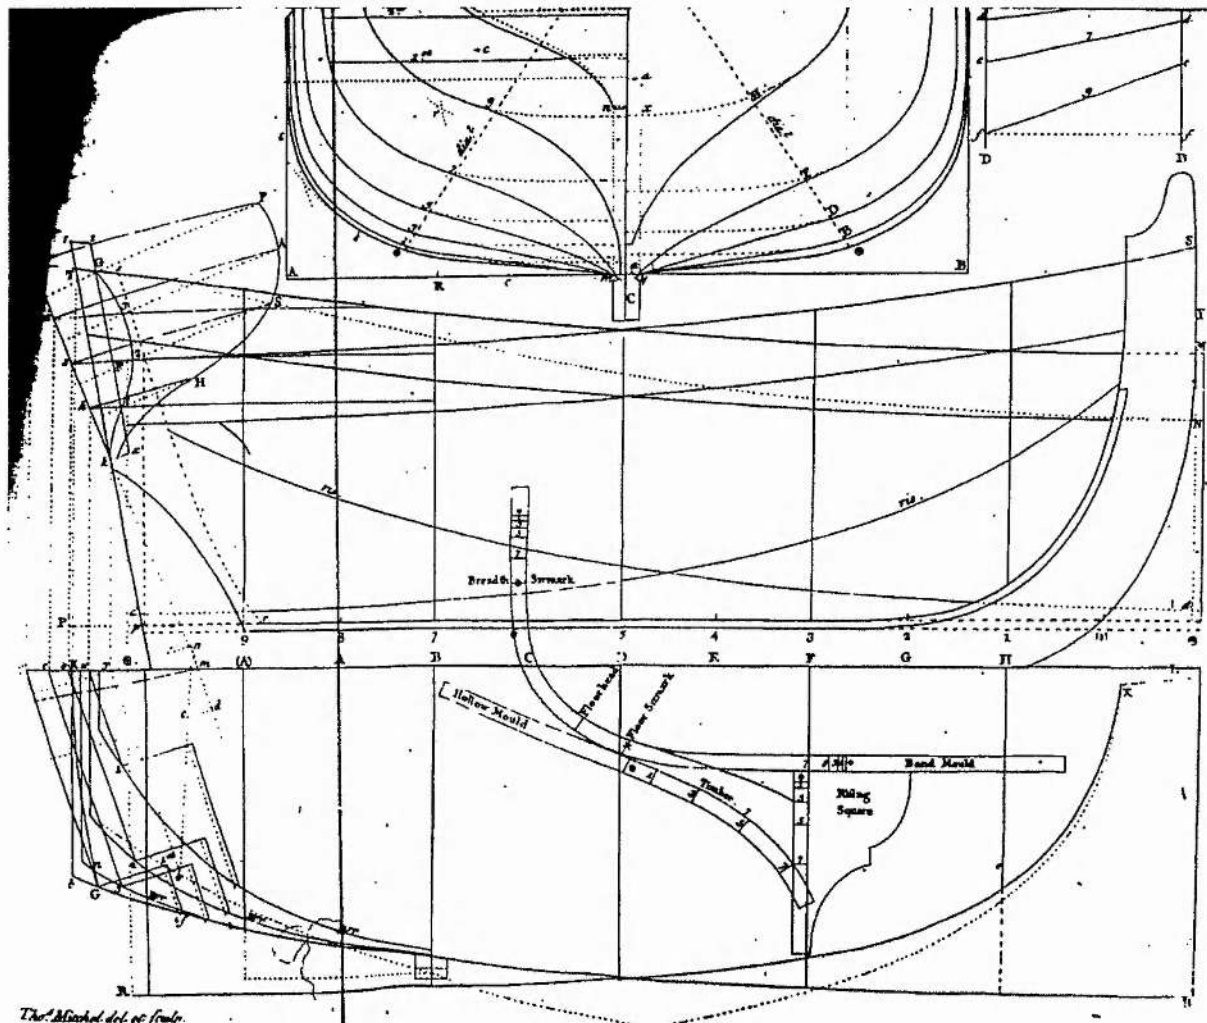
Illustration of the technique of whole molding for forming a ship's hull (Murray 1765:173, Plate VI).
